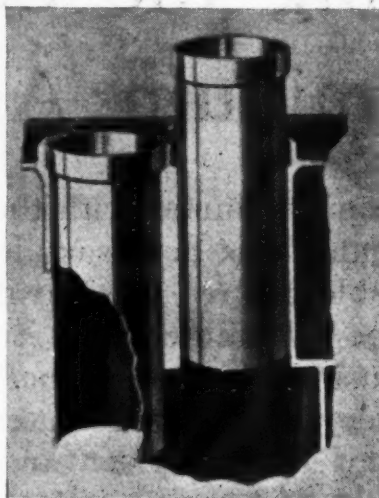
Showing old method of inserting cast iron sleeves in aluminum body
